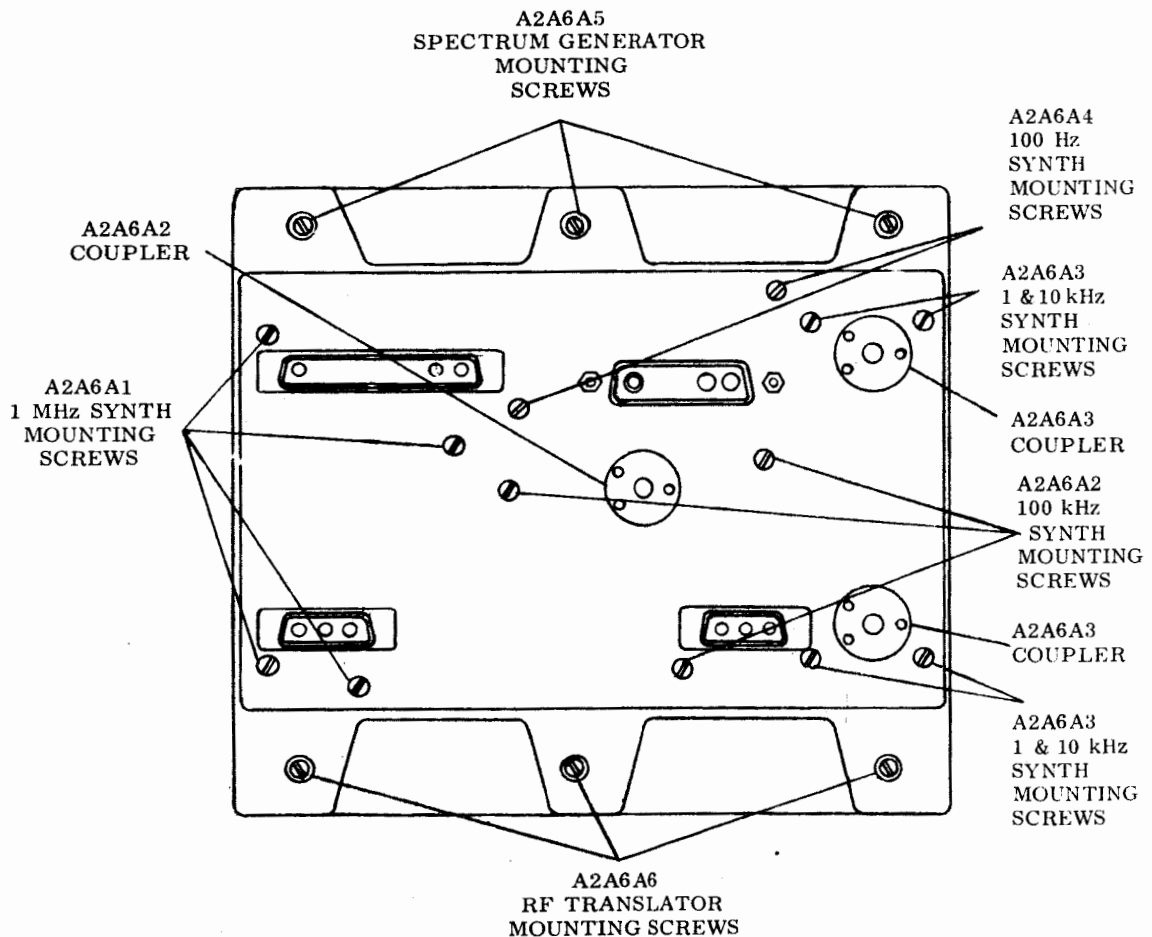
Translator/Synthesizer Assembly A2A6, Bottom View, Mounting Screws Identification
